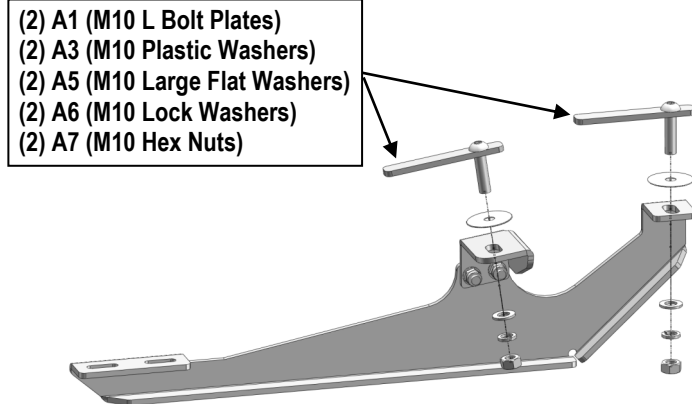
M10 L Bolt Plates Installed In The Front Mounting Holes (With M10 Plastic Washers)
